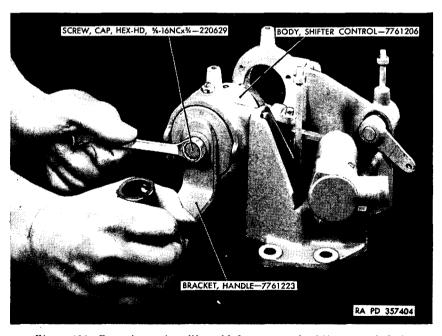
Removing or installing of bolt on gunner's shifter control shaft.
